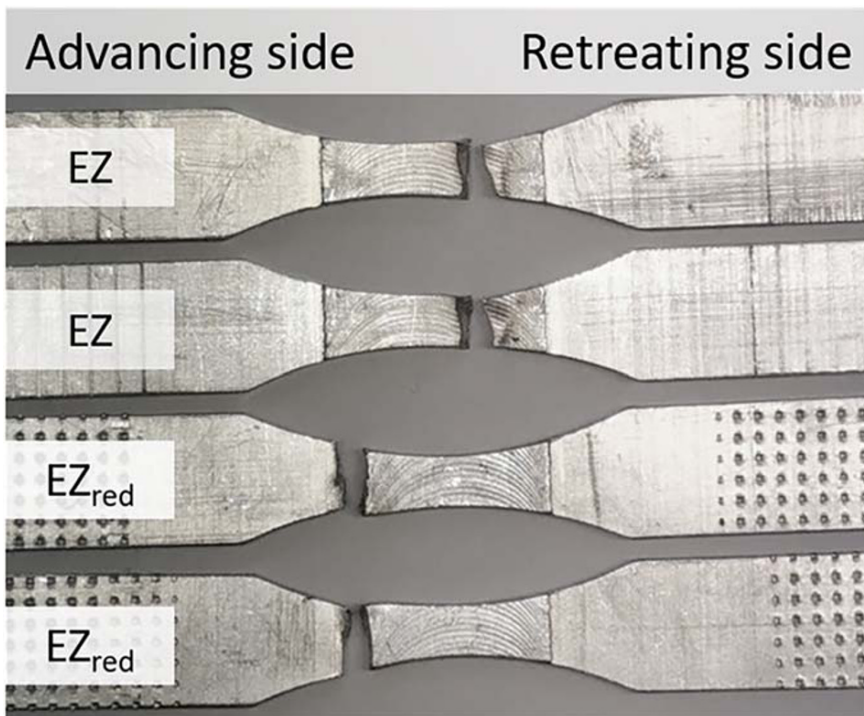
Photographs showing the location of the final fracture for selected fatigue specimens representing the EZ and the EZ_{red}. EZ, extrusion zone [Colour figure can be viewed at wileyonlinelibrary.com]
